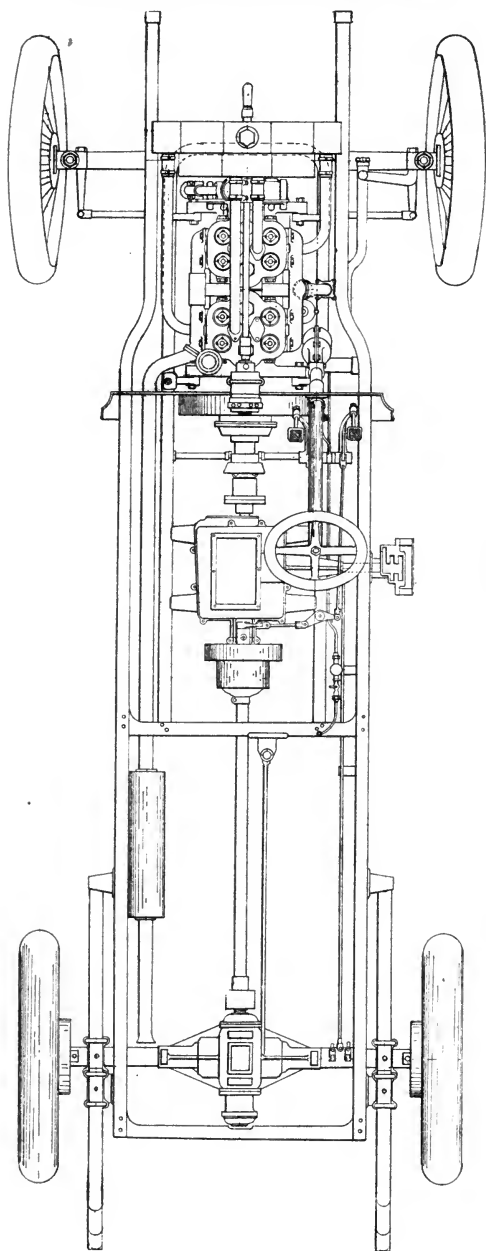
PLAN OF GEAR-DRIVEN CAR, WITH WORM DRIVE TO THE BACK AXLE.
